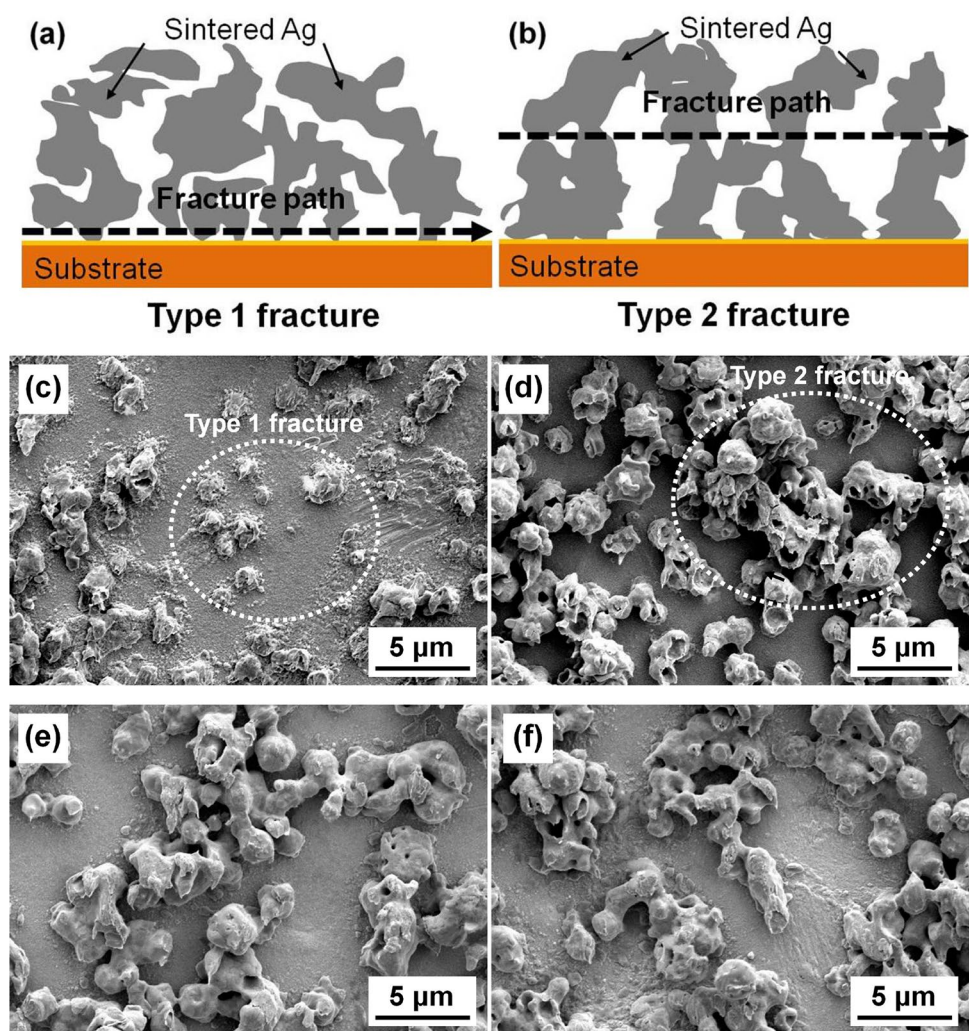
shows the schematic illustrations of fracture position and the typical fracture surfaces according to the sintering temperature. In Fig. 6a, b, two fracture types depending on the fracture path were defined. Type 1 fracture is a failure between the sintered Ag particle and the substrate. Type 2 fracture is a failure between the sintered Ag particles. Type 1 and Type 2 fractures appear on the fracture surface as shown in Fig. 6c, d (white circle). The amounts of both fracture types on the fracture surface of joint sintered at 250°C were similar, whereas there were a few Type 1 fractures on the fracture surfaces of joint sintered at 300–400°C (see Fig. 6d–f). Since fracture generally occurs in a weak part, the reduction of Type 1 fracture indicates that the bonding between Ag particles and the substrate is enhanced as the sintering temperature increases.
